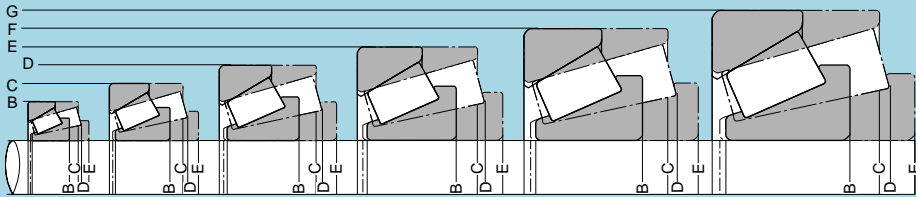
Comparison of dimension series for tapered roller bearings
